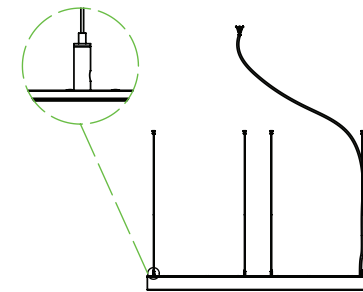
Fit the cable adjustment/locking mechanism to the back of the fitting using the M5 screws supplied
